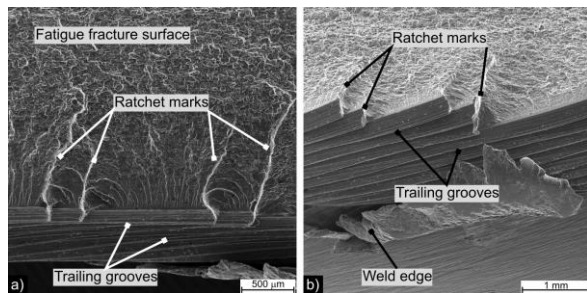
Fatigue crack initiation from the surface grooves in the HAZ/TMAZ transition on the advancing side observed by scan electron microscopy: a) fracture surface top view; b) angled view.
